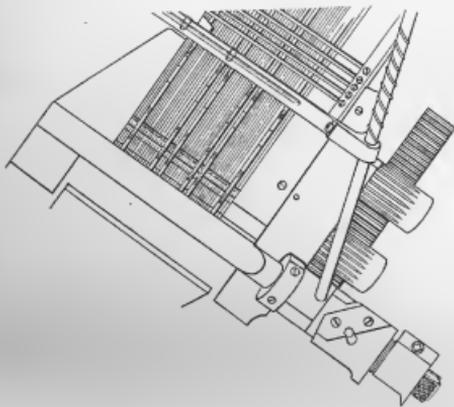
Typograph; line of single-letter matrices, line-justified ready for casting.
